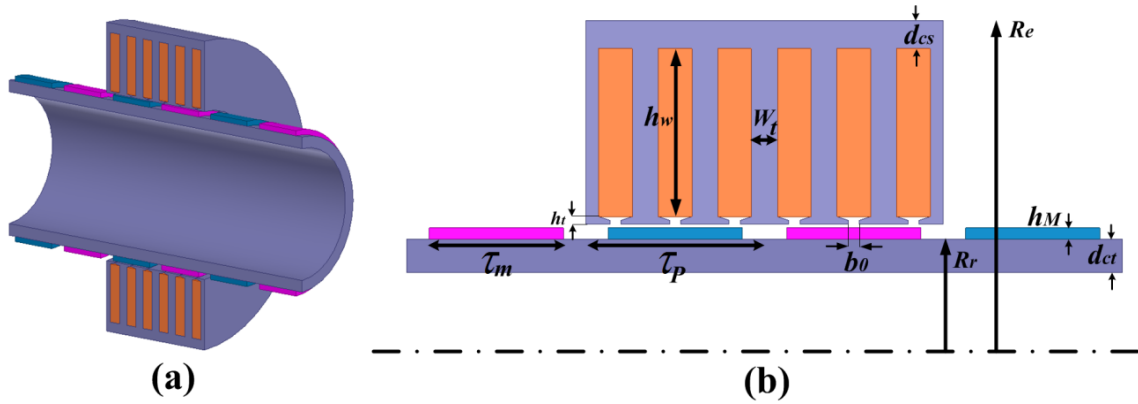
A PM LTM. (a) cut-away view. (b) 2D view with geometrical design parameters.
